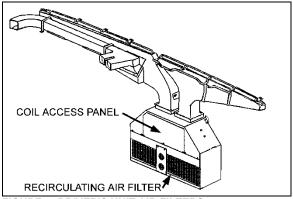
DRIVER'S UNIT AIR FILTERS
